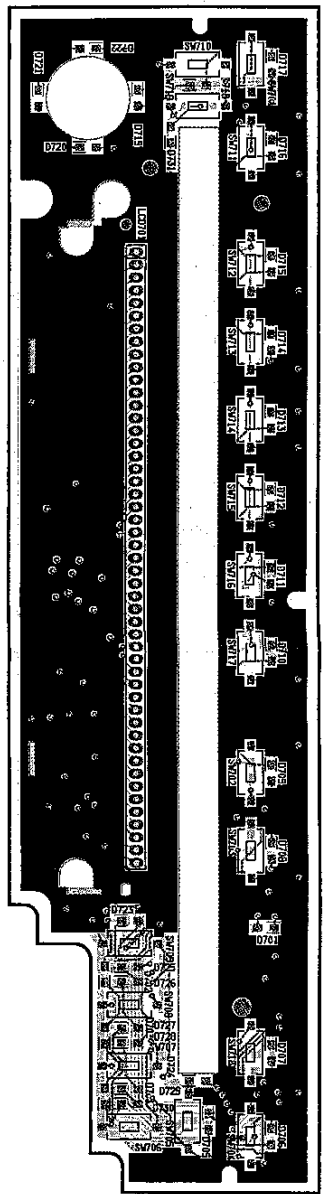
Tone P.C.B. Assy-Parts Side
